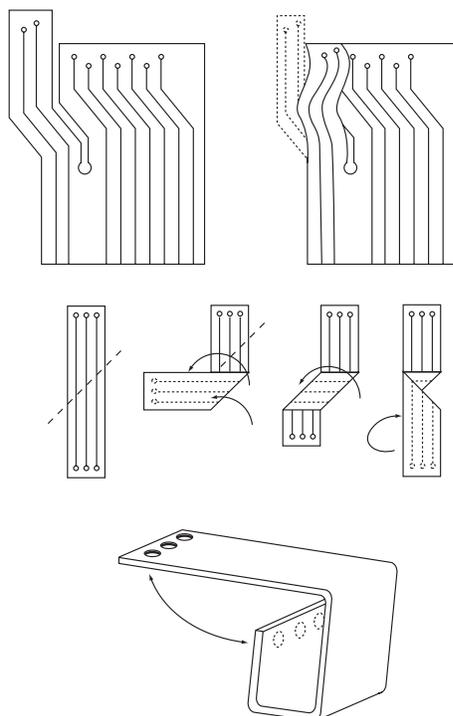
Techniques used to reduce need for reverse baring of solder pads.
